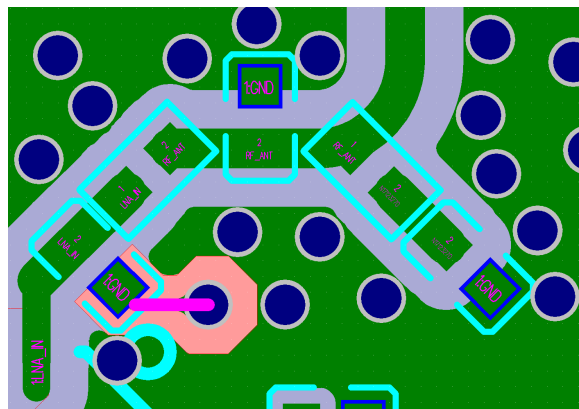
ESP32-S3 Stub in a Four-layer PCB Design
